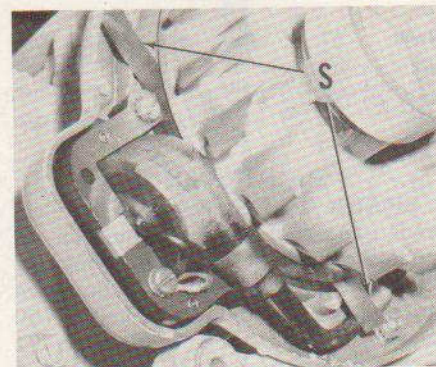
View showing method of checking air gap using shim stock (S).
